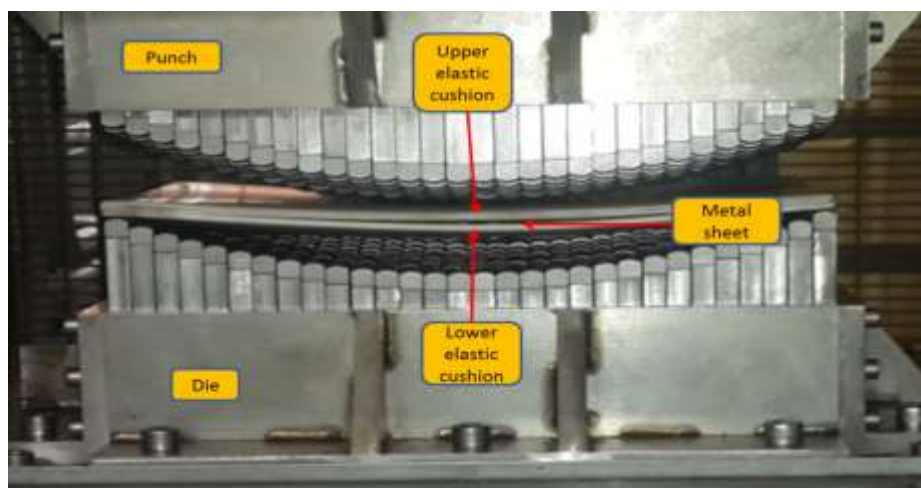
Position of metal and elastic cushion sheets in discrete tool
